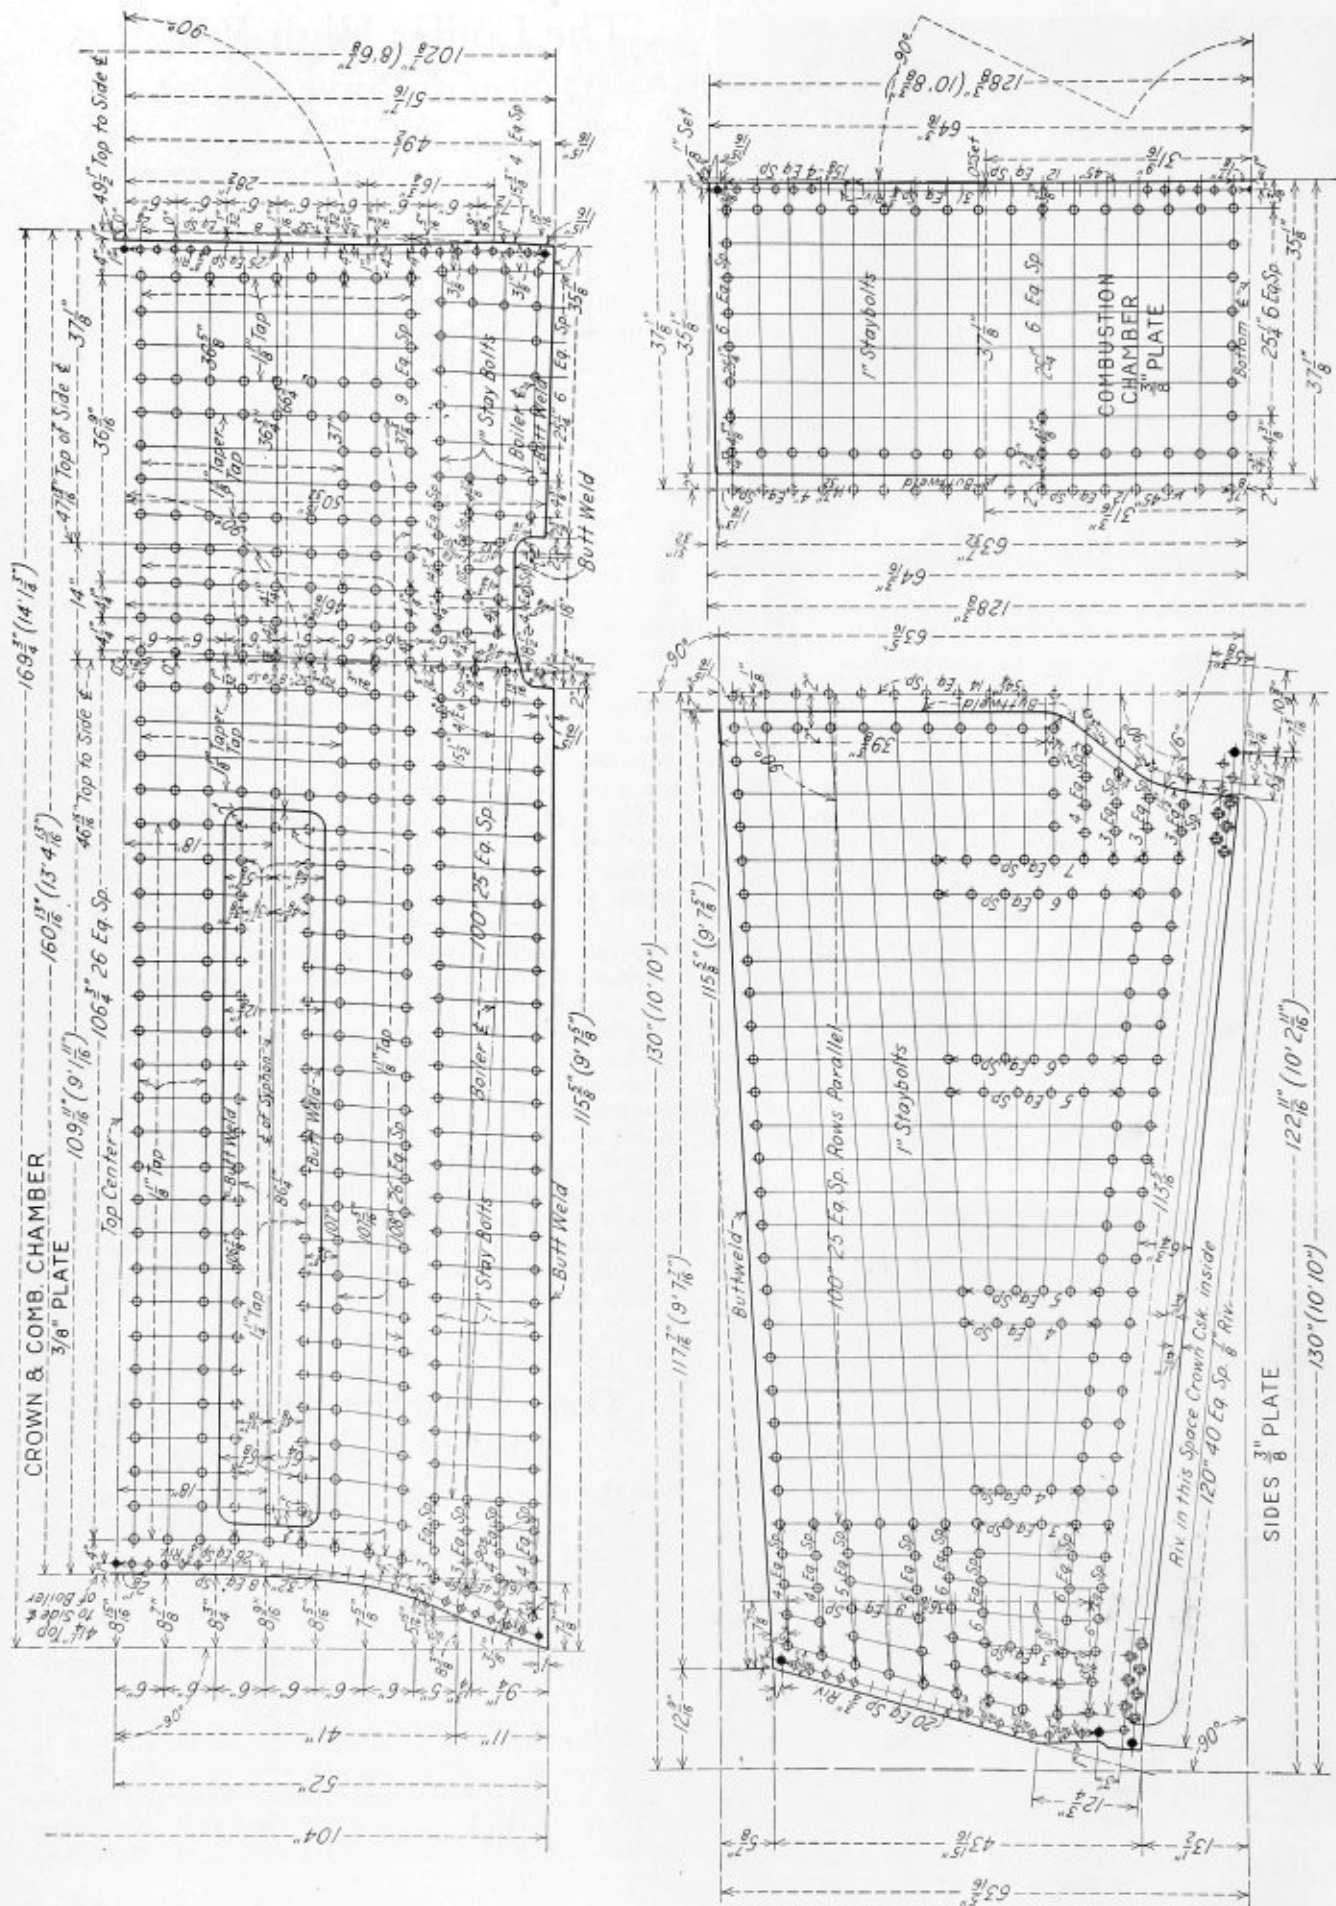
Development of four-piece crown, sides and combustion chamber sheet. Connected together with butt-welded seams. Also showing cuts in the crown sheet for the application of two Nicholson thermic siphons
